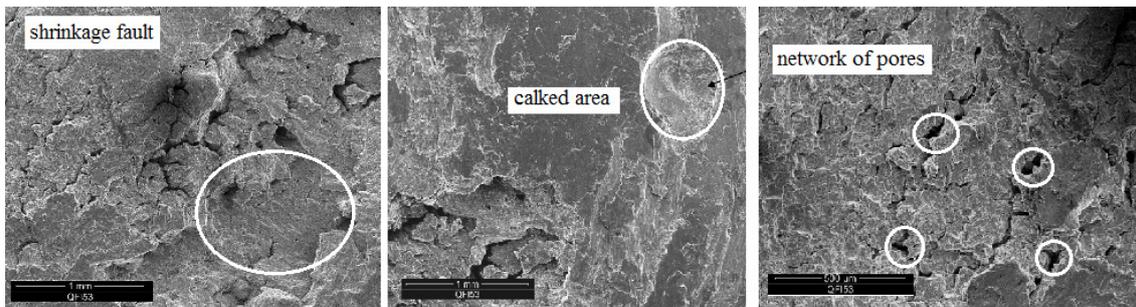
Examining the fracture surfaces using the scanning electron microscope
